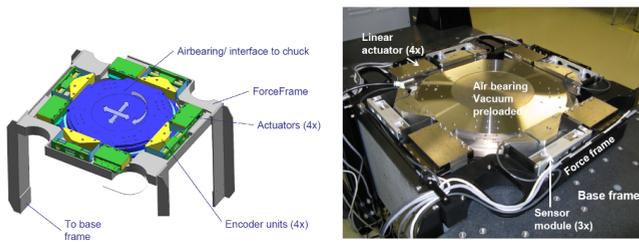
Drive and control concept using air bearings, linear motors, linear encoders and a force frame
